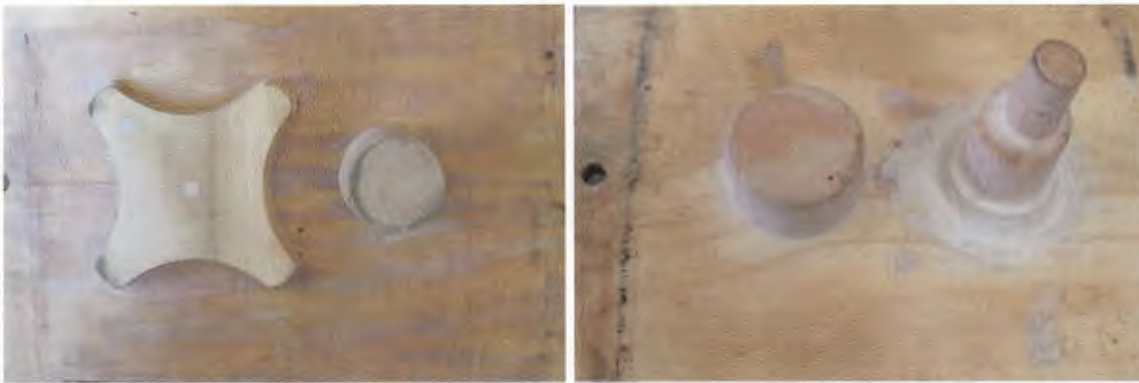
On the left is the bottom view of the pattern used to make the hubs, the top view is on the right.
